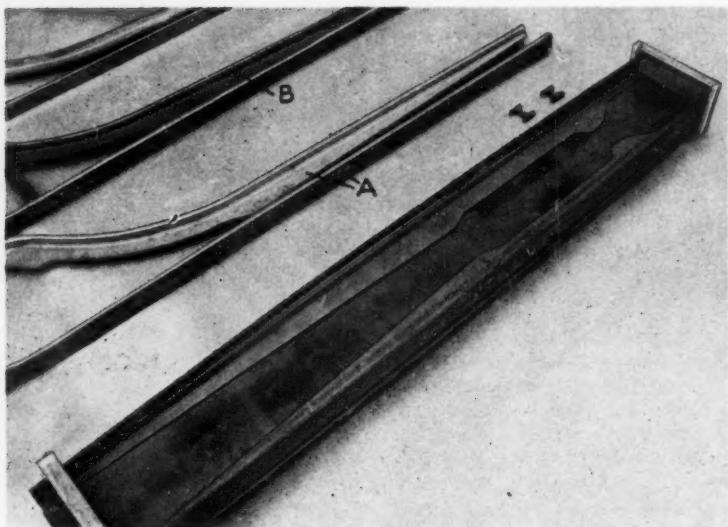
A Basic Stage in the Manufacture of the Flap-track Seen in Fig. 6. A Standard-section I-beam has been Separated in the Lengthwise Direction by Profile Flame-cuts to Produce the Two Track Members. After Hot-forming, the Parts are Assembled as Seen at *A* and Welded Together, as at *B
